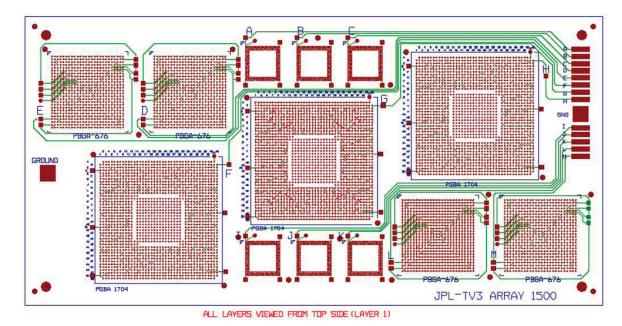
Test vehicle design showing combined package and board daisy-chain patterns at three locations for the 1704 I/O flip-chip BGA (FCPBA) package with 1-mm pitch and 42.5-mm² body size. Location and board daisy-chain patterns for PBGA 676 I/Os and 432 I/Os are also apparent in the design.
